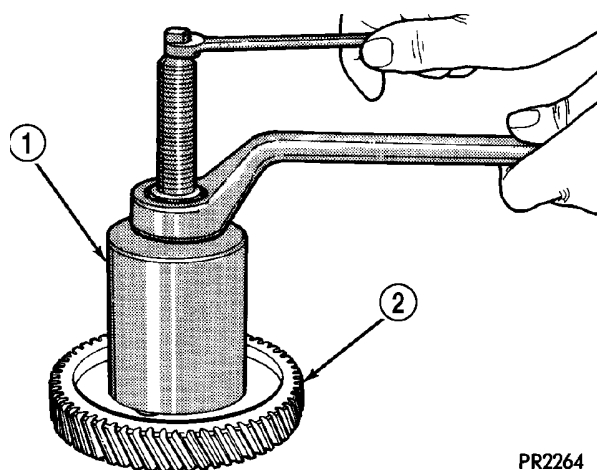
Using Tool L-4406-1 with Adapter L-4406-3, Remove Transfer Shaft Gear Bearing Cone
